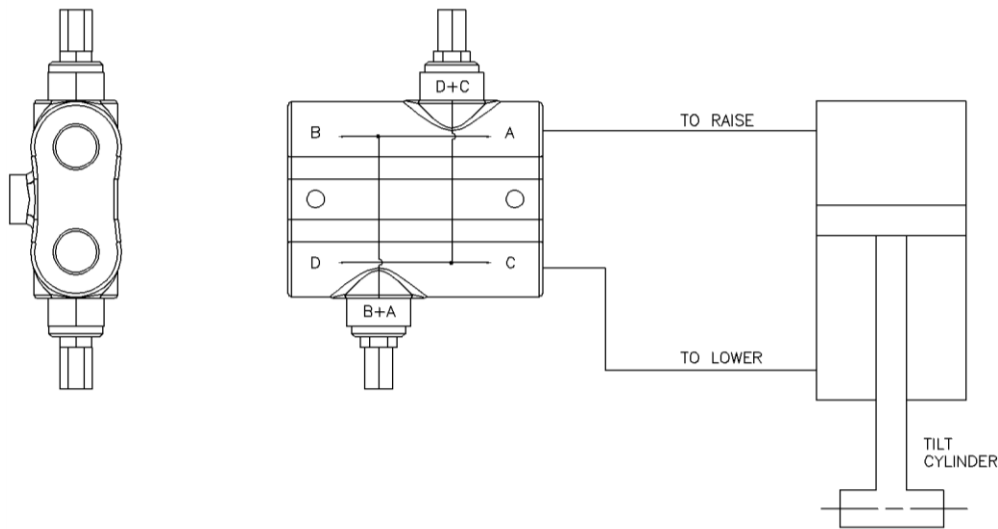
Adjusting the Cushioning Valve of the Axle-Lift
